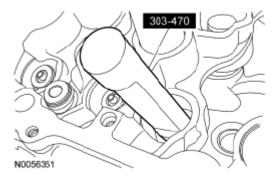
Identifying Valve Stem Oil Seal Installer Courtesy of FORD MOTOR CO.
